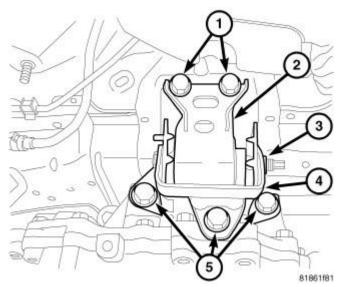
Left Engine Mount Assembly Courtesy of CHRYSLER GROUP, LLC
